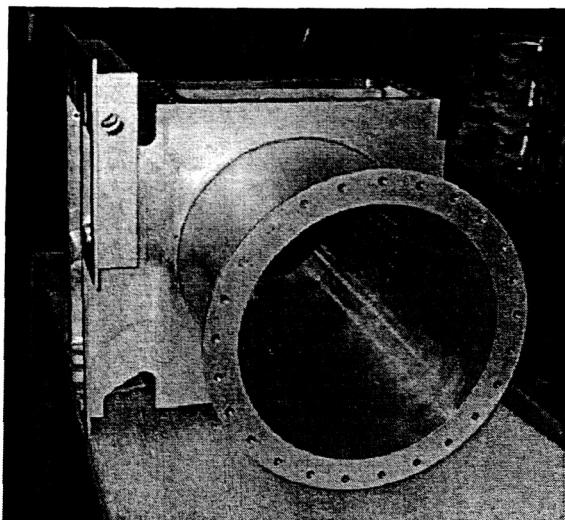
Rear View of the Processing Chamber showing Piston Seal Surfaces
